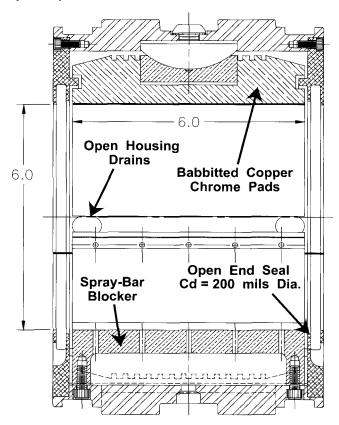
34,500 HP Pinion Bearing with Chrome Copper Pads and By-Pass Cooling.
